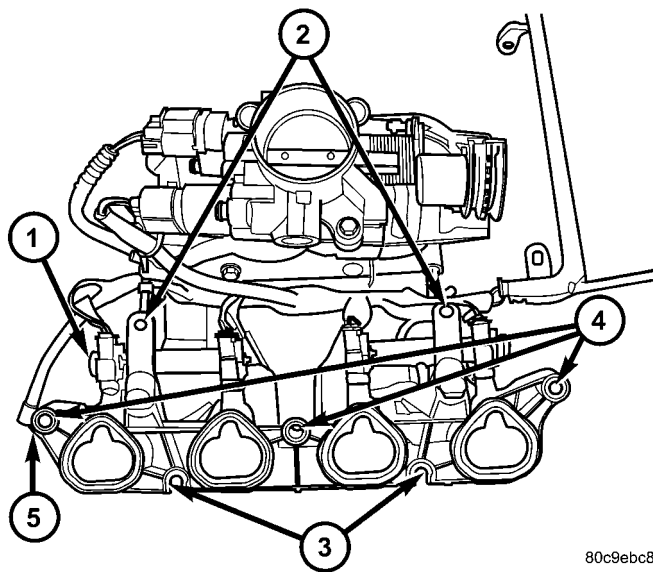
FUEL RAIL MOUNTING - 2.4L
